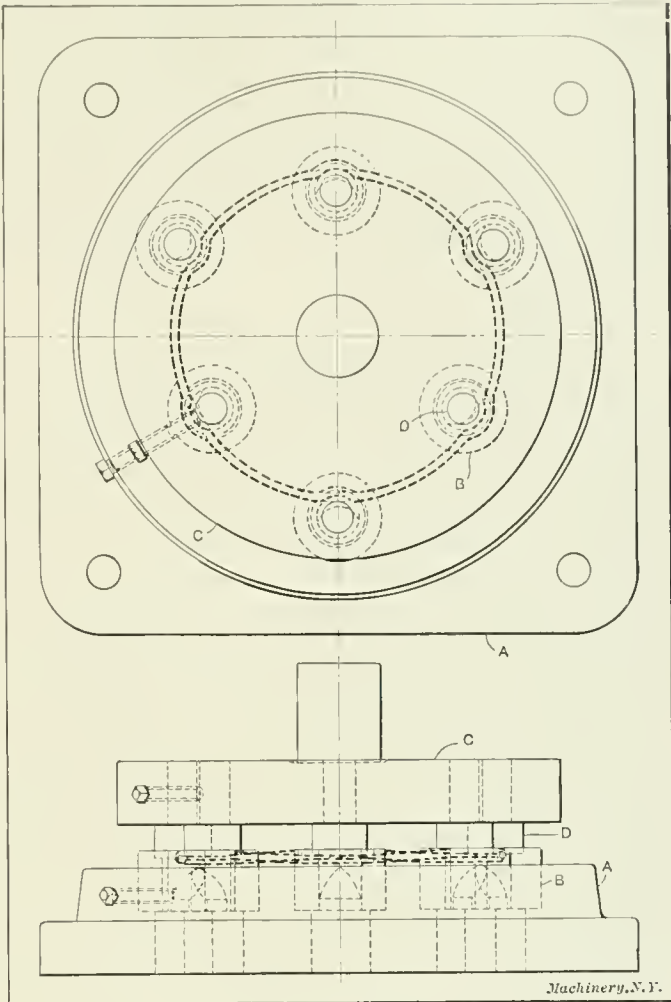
Assembled View of the Punch and Die for Shaping the Retaining Ring
